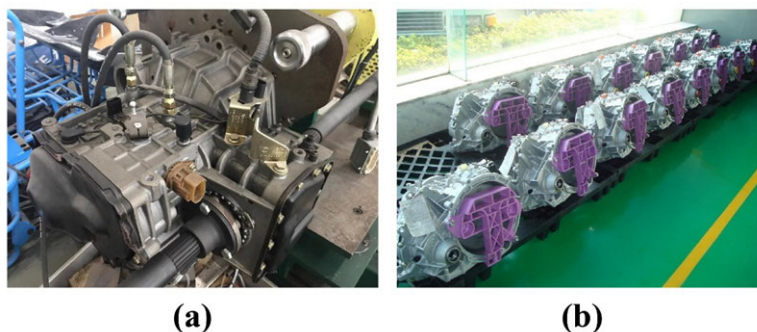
Remanufacturing process of a used vehicle CVT system: (a) used vehicle CVT system; (b) reprocessed vehicle CVT gearbox in the laboratory.
